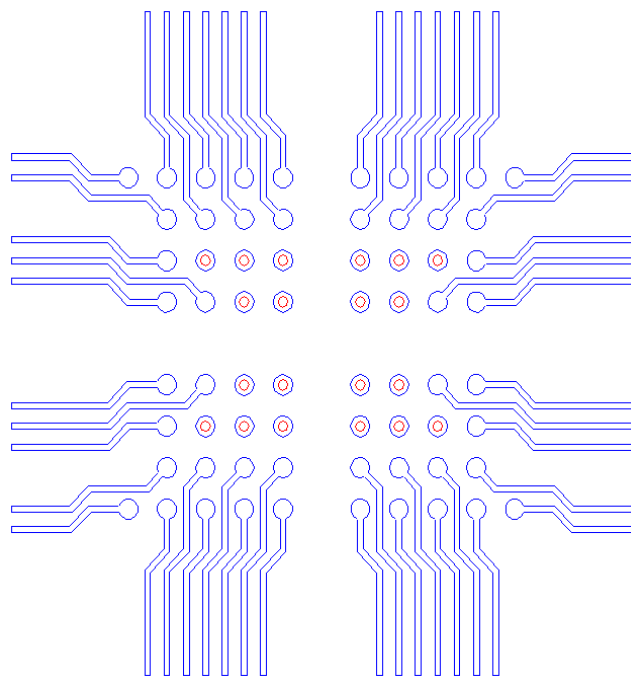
• Suggested Board Layout of Soldered Pads for CS81 CSPs (PCB Lower Layer)
